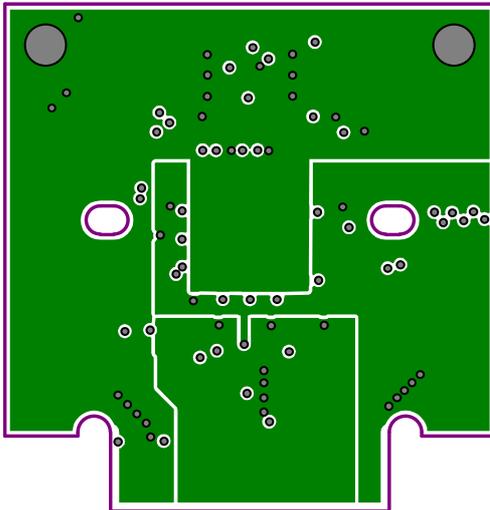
epc660 Card Edge Connector Carrier: Layout middle top and bottom
